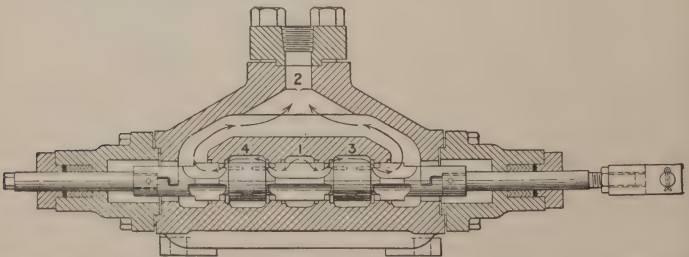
Sectional view of four-way by-pass valve shown in Fig. 321. In this view the valve is in neutral position and the oil is by-passing from port (1) to port (2).
